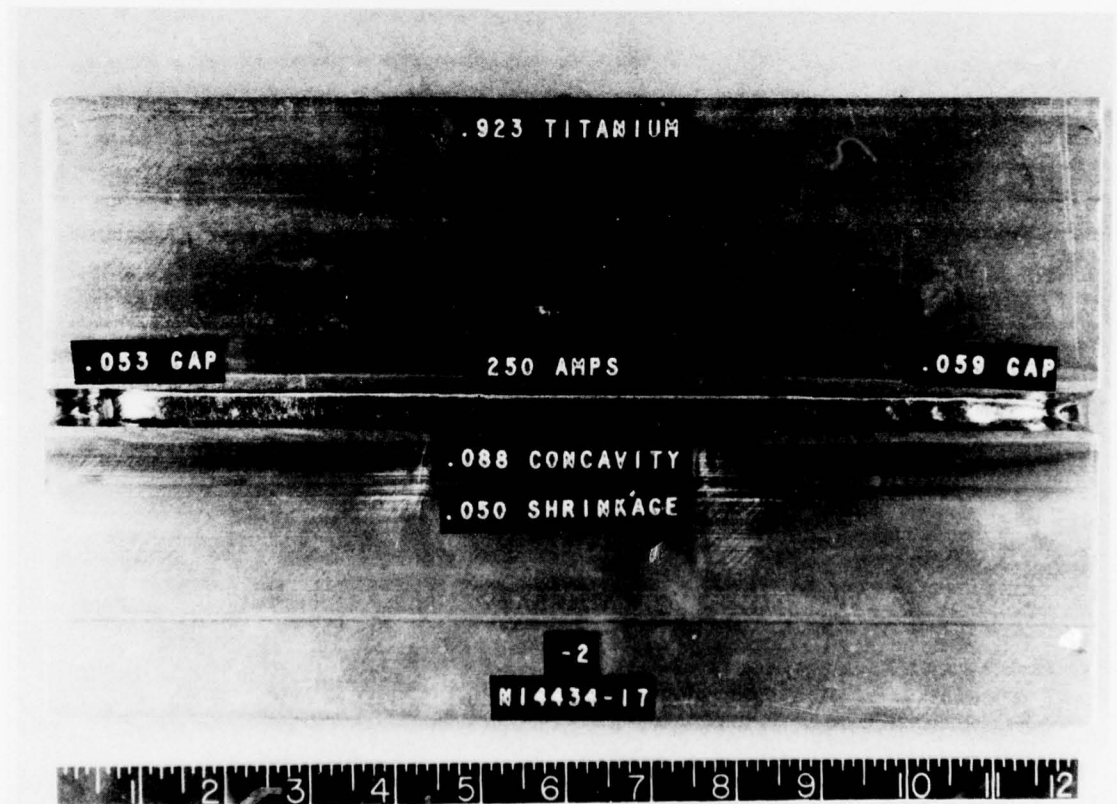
PAW Single Pass in 0.923 Inch Thick Plate
